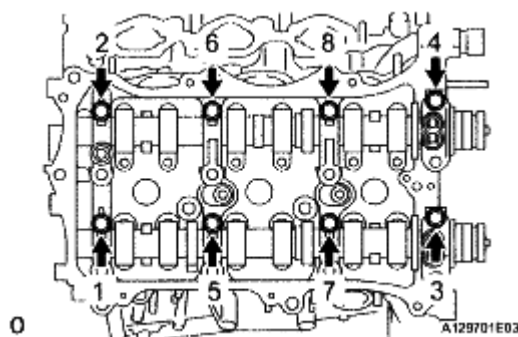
Identifying Bearing Cap Bolts Loosening Sequence
